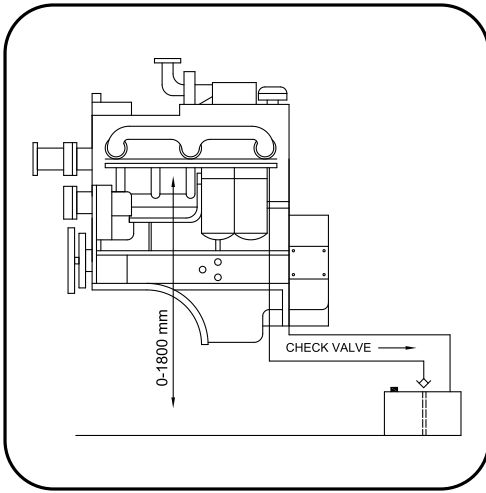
/ Typical fuel diagram with fuel tank placed below the engine
